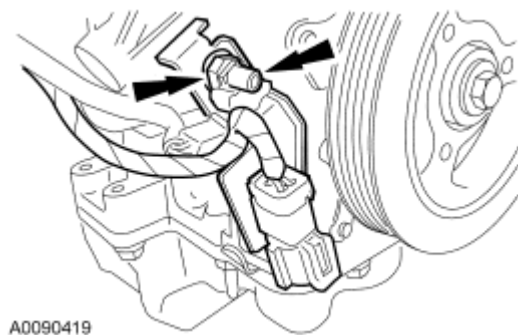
Locating Heated Oxygen Sensor (HO2S) Electrical Connector Bracket
